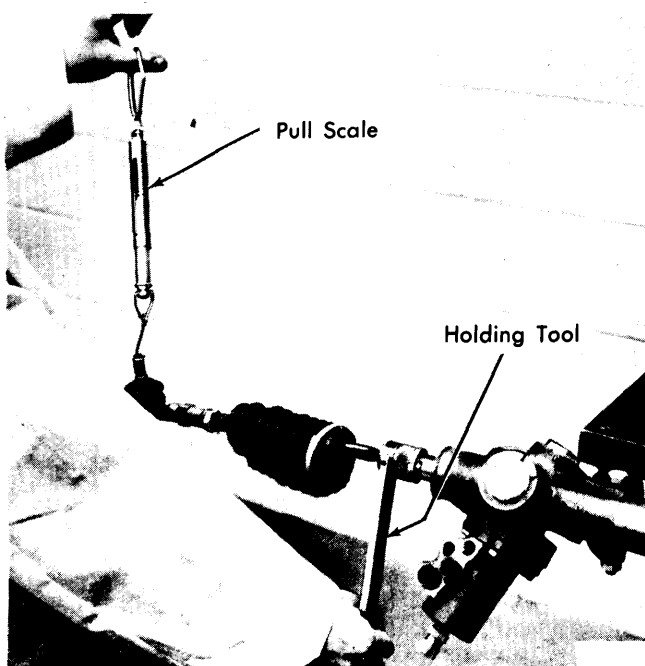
Tie Rod Inner Ball Socket Preload Adjustment
